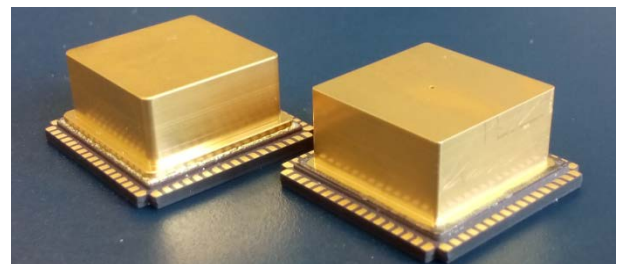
Vacuum encapsulated PPs (left) traditional soldering; (right) Seam welding followed by laser soldering of a hole on top of the lid.
